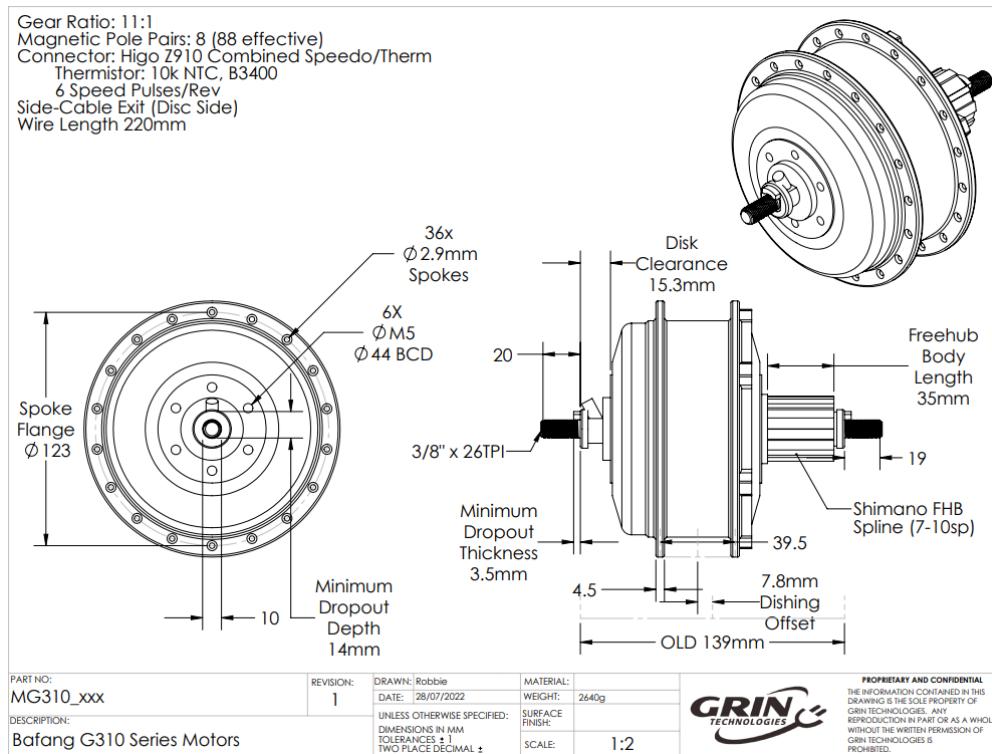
Bafang G310 Motor Schematic (copyright pending)
